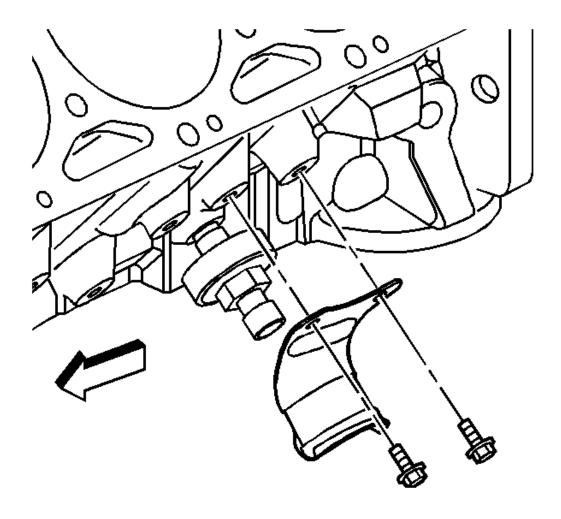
View Of Left Side Knock Sensor Heat Shield & Bolts Courtesy of GENERAL MOTORS CORP.
